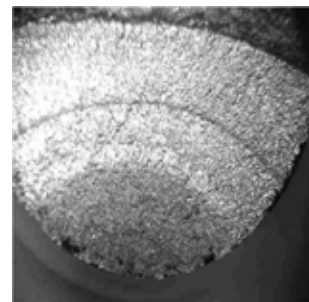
Copper fracture surface (94.5 MPa; 7.7E7 cycles).
